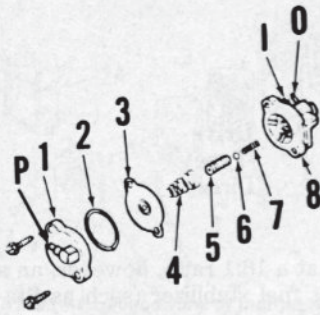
Exploded view of automatic oil pump. Oil enters pump through inlet tube (I) and exits through tube (E). Diaphragm (3) is actuated by crankcase pulsations through pulse fitting (P).
